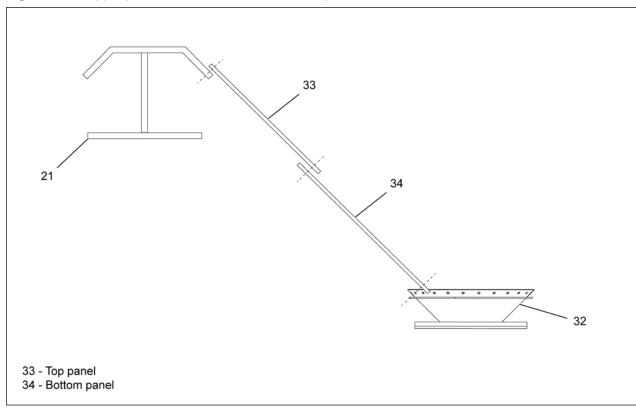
Hopper panels and collar weldment overlap details
